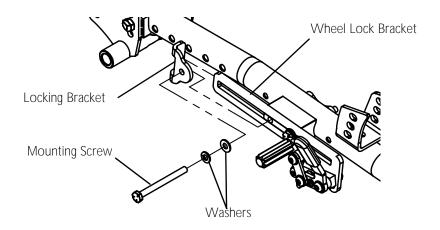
Install Locking Bracket on Wheel Lock
